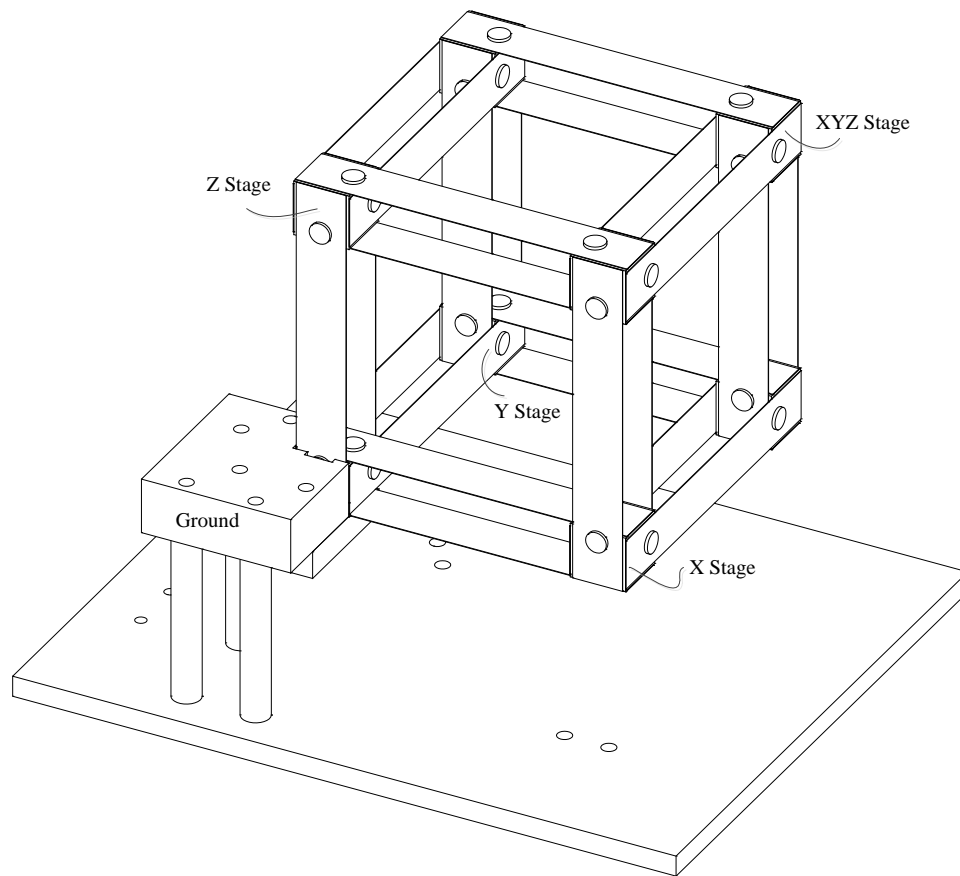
Second XYZ Flexure Mechanism CAD Assembly
